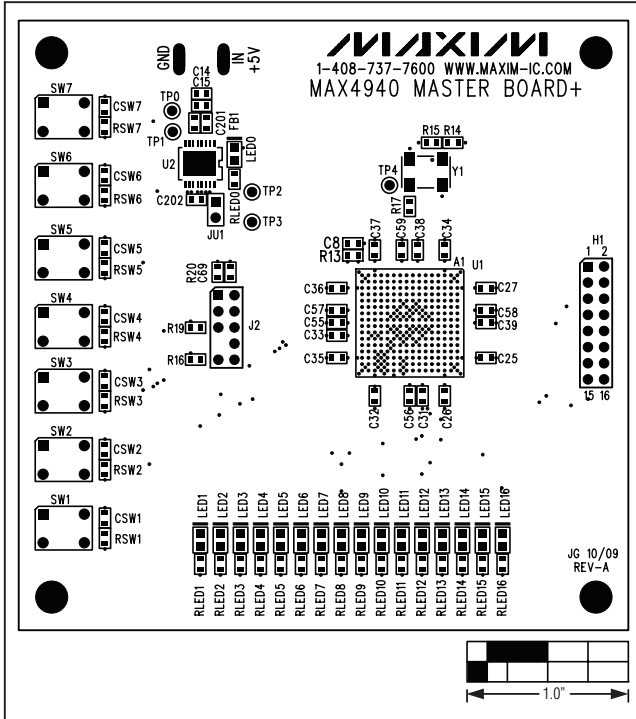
MAX4940 Master Board Component Placement Guide—Component Side
